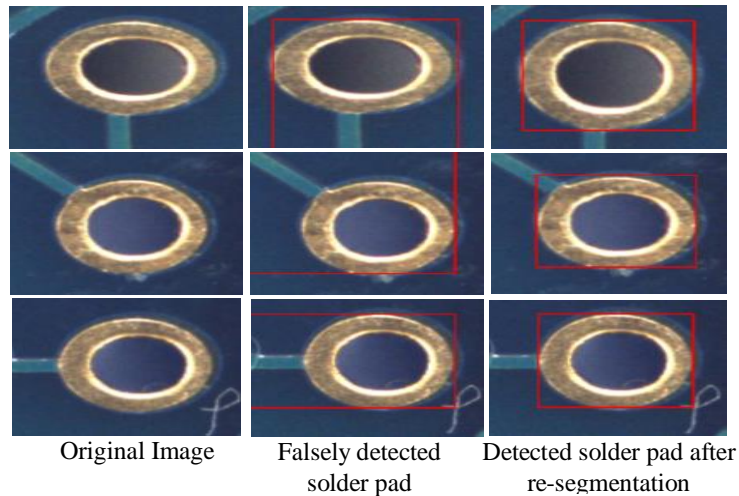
Accurate detection of solder pads after removing the effect of PCB tracks on blue colour PCBs with gold-plated solder pads
